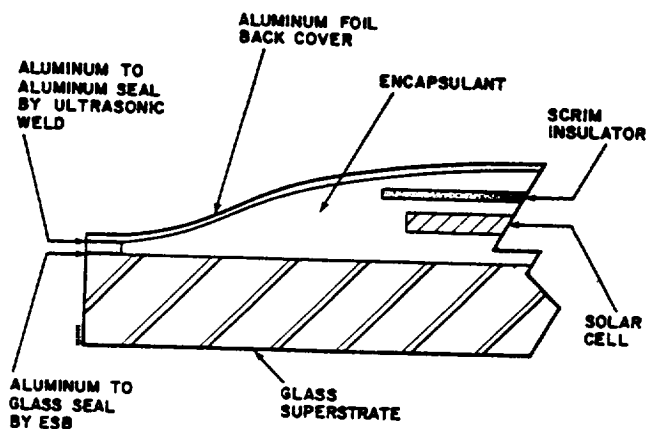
Glass Superstrate Design Module with Aluminum Foil Back Cover and Hermetic Edge Seal
